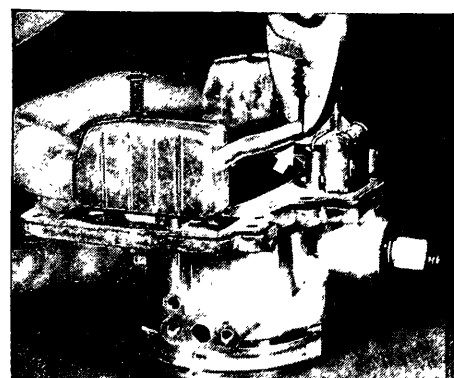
B If float position has to be changed, bend center section of float lever with pliers as shown
